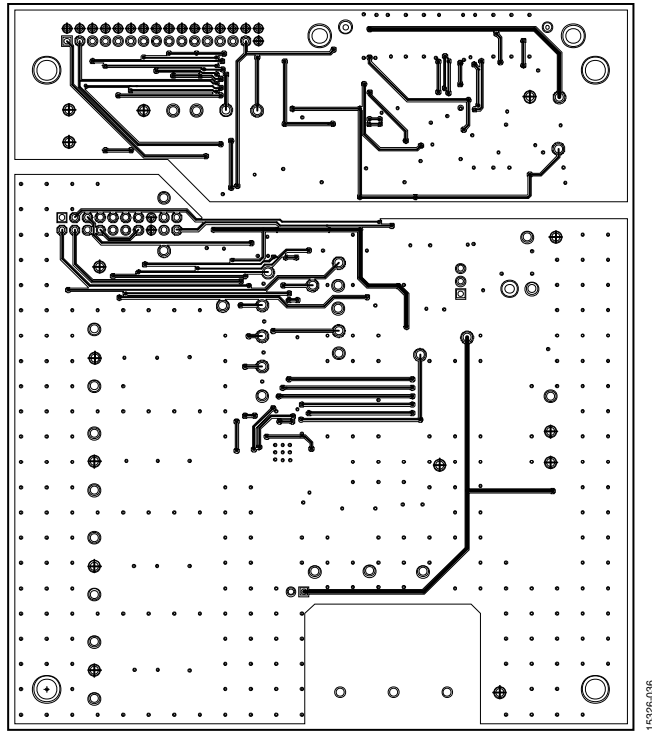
Layout of the Bottom Layer of the Evaluation Board
